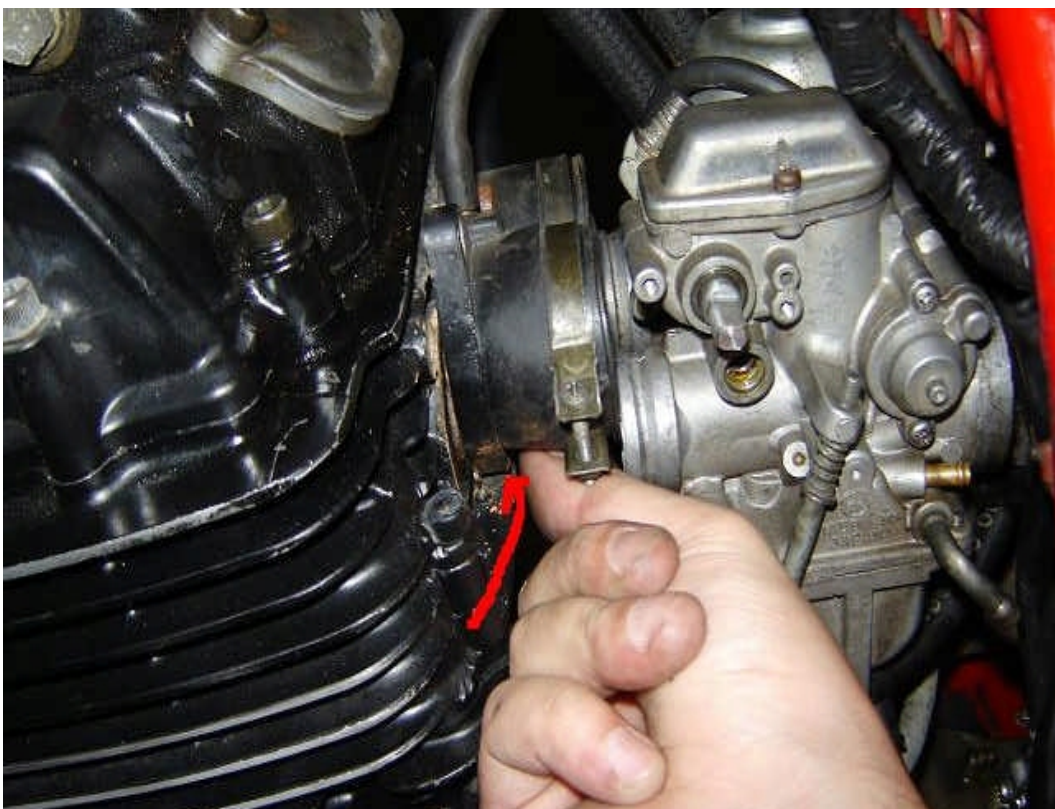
Then tilt the manifold up slightly to gain access to the bottom screw, once removed pull the left manifold clear & be carefull not to damage or loose the rubber O-Ring.
